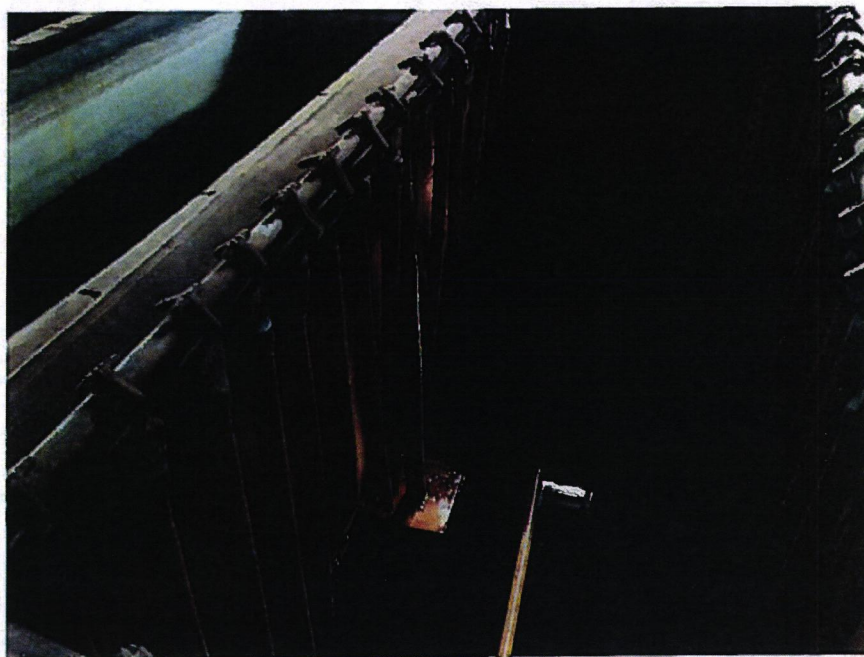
09/06/2016. Main plating line tank with lead anodes hanging from steel piping on the sides of the tank.
